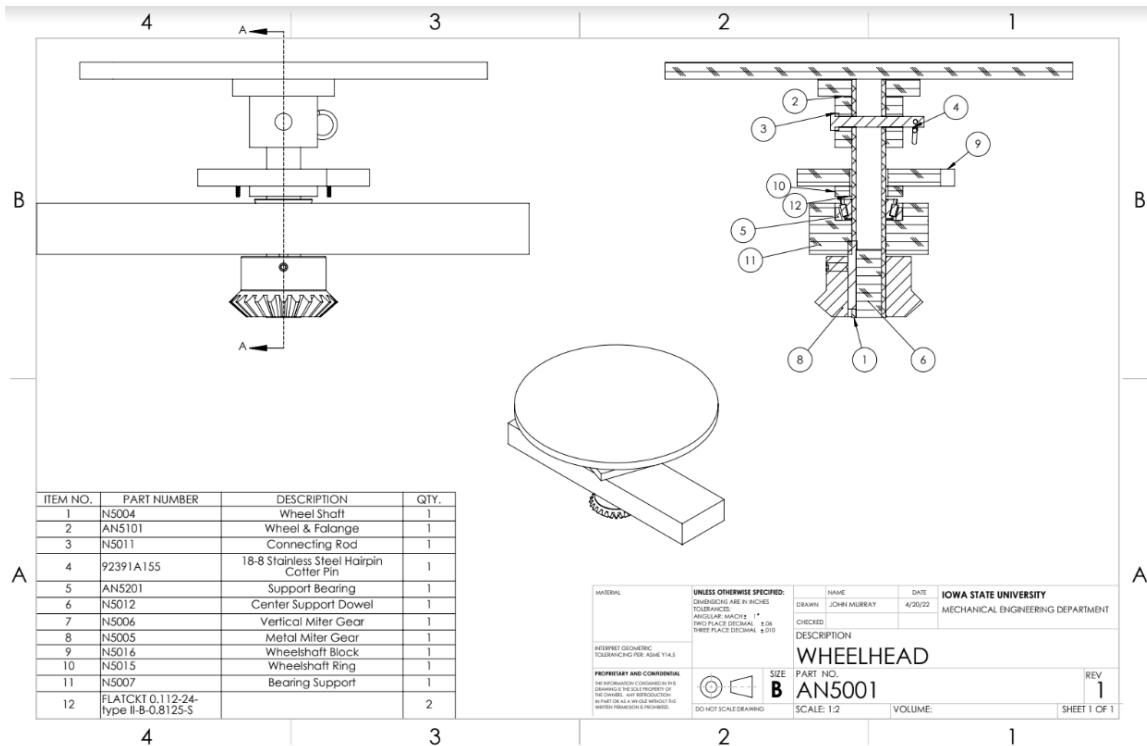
Wheelhead Subassembly. It has two subassemblies and some connecting parts.
